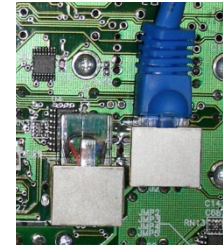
Final Accessory Panel with RJ-45 Termination Block installed.
